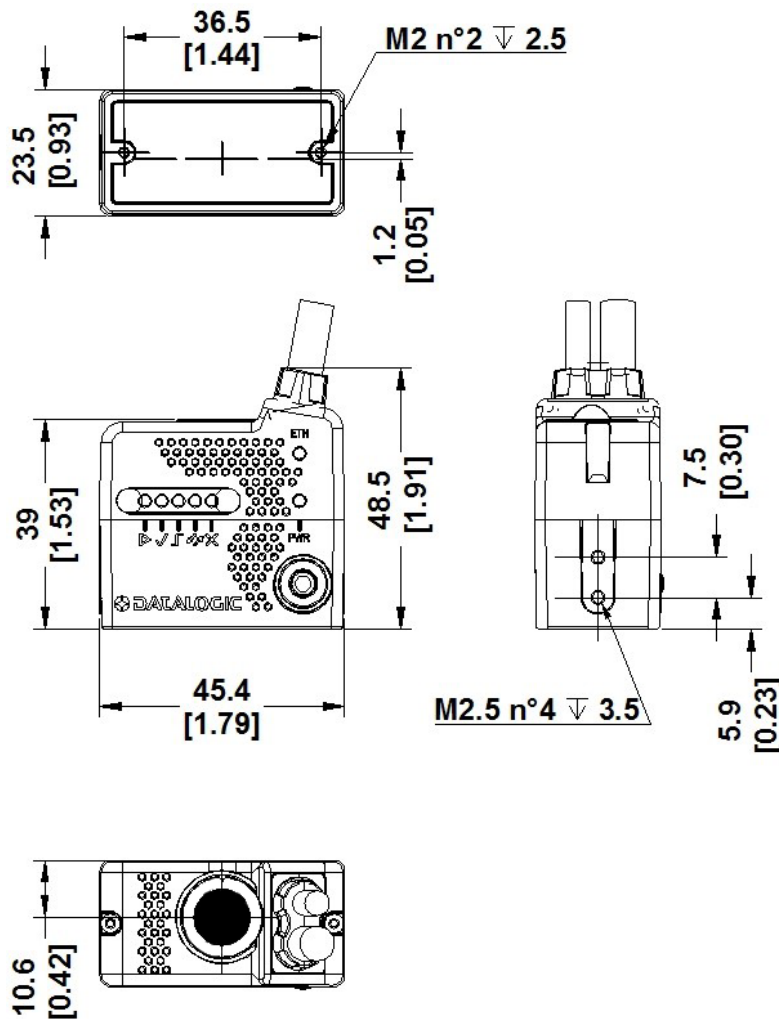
Matrix 120 311-215 mechanical dimensions
